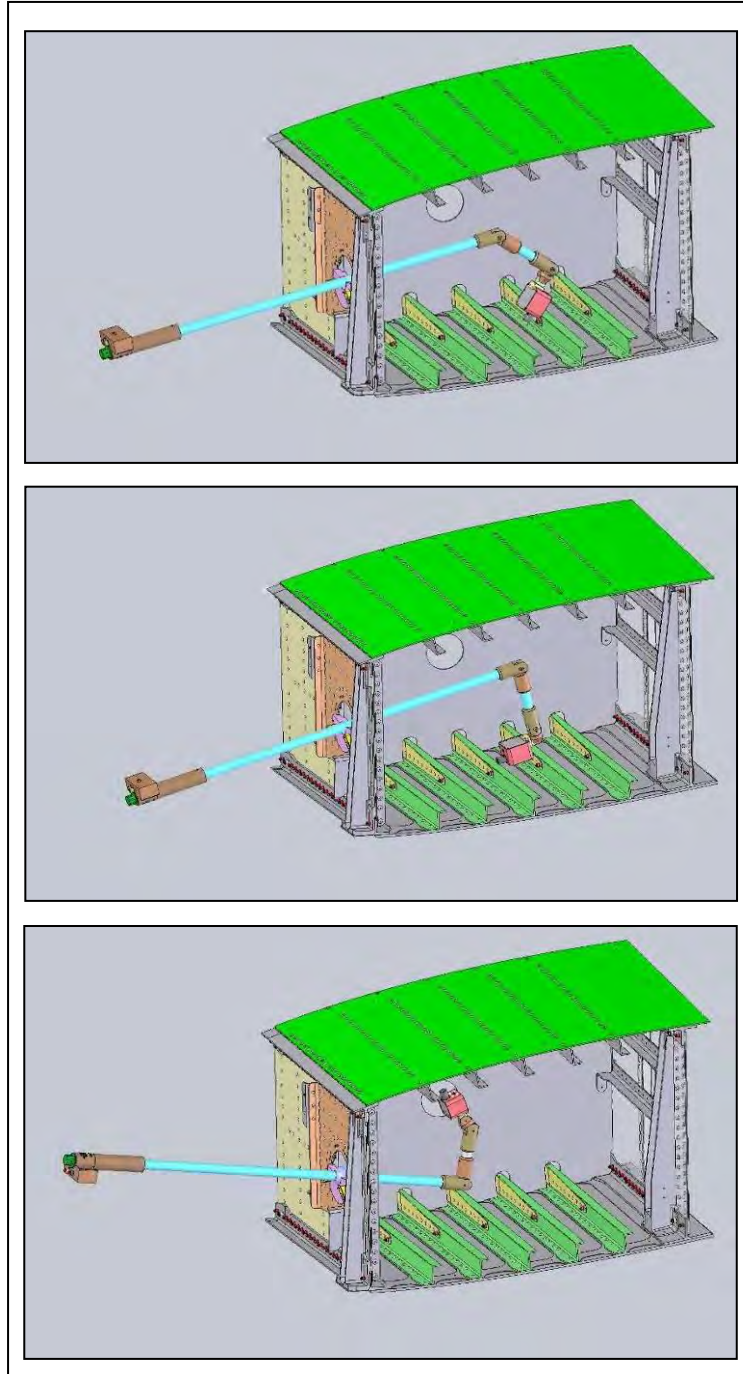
CAD views of inspection scenarios modeling the tool motions within the inspection volume for the lower (top 2 images) and upper (bottom image) inspection areas.
